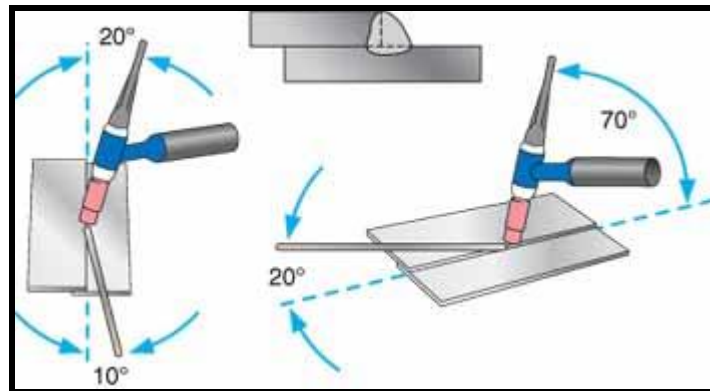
Schematic representation of lap-welding technique in manual GTAW process.
